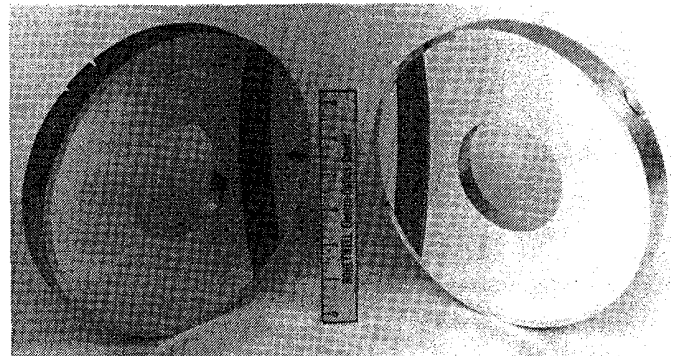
Aluminum and copper mirrors showing improved flexures.
